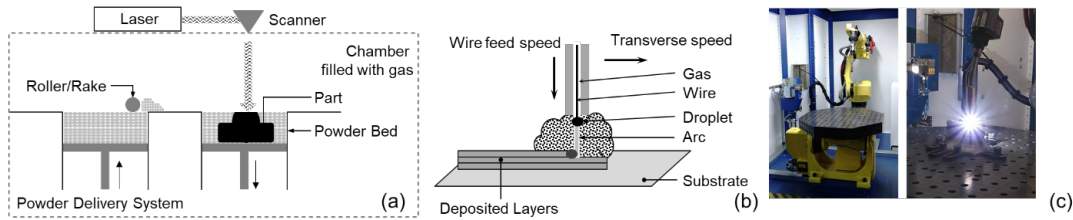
Principle sketch of the material feed before the heating process (a), material feed during the heating process (b), and welding robot for deposition on a turn/tilt table (www.b-tu.de) (c).
